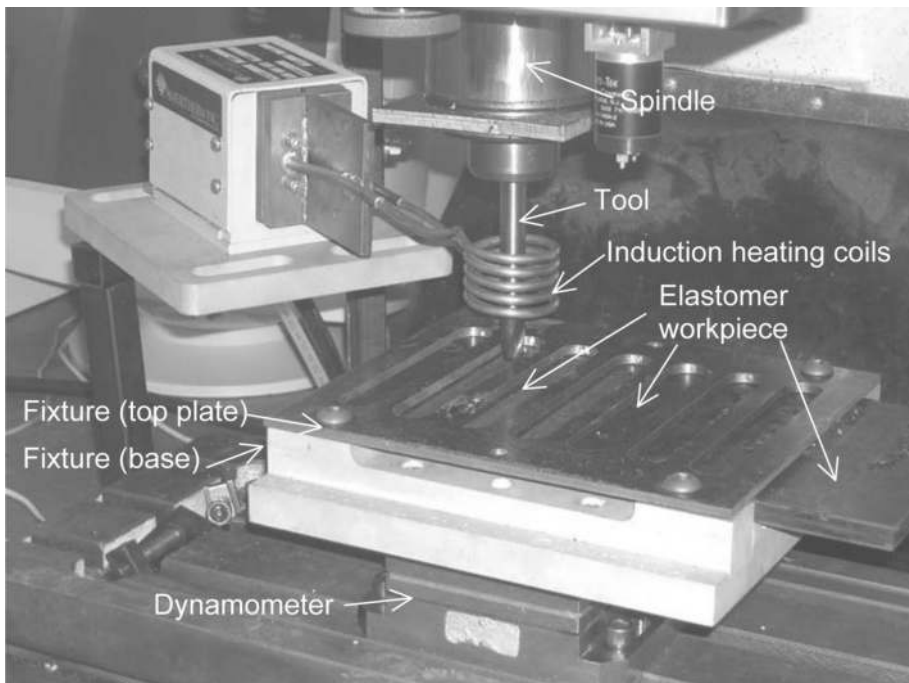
Experimental setup of elastomer end-milling with tool induction heating [23].
